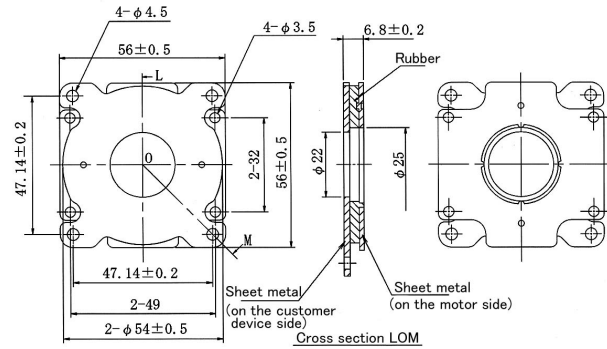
External Dimensions of the Damper (for 56sq. mm)
